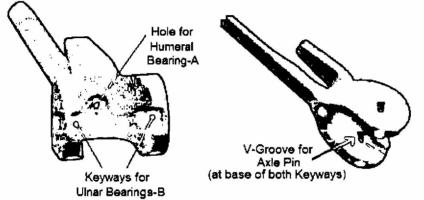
Humeral Component, design features for mating to bearings and axle-pin
